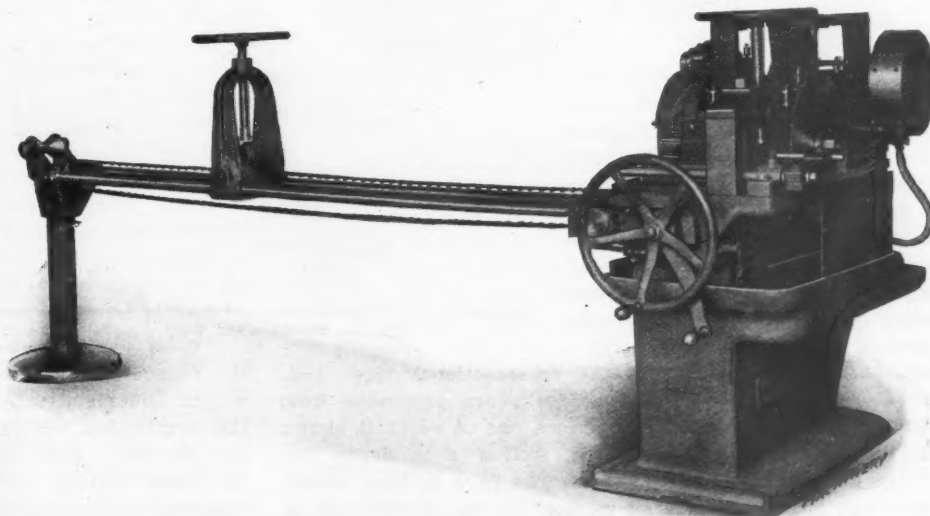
Combination Guard and Lubricator for Nutter & Barnes Machines
